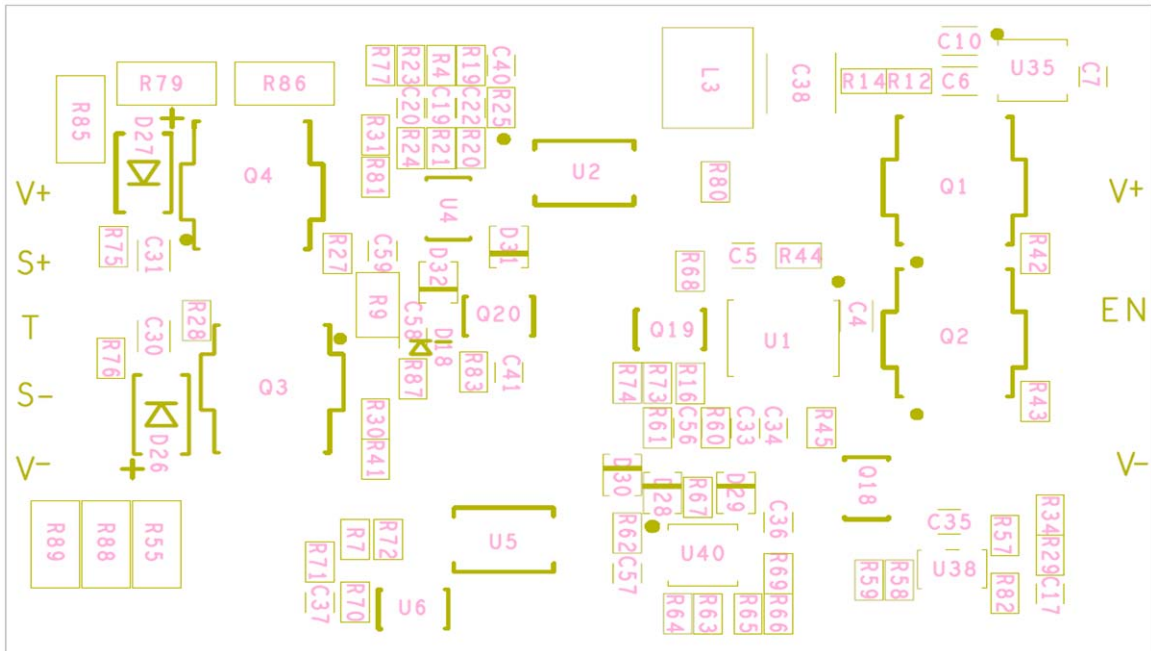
ASSEMBLY BOTTOM MIRRORED
